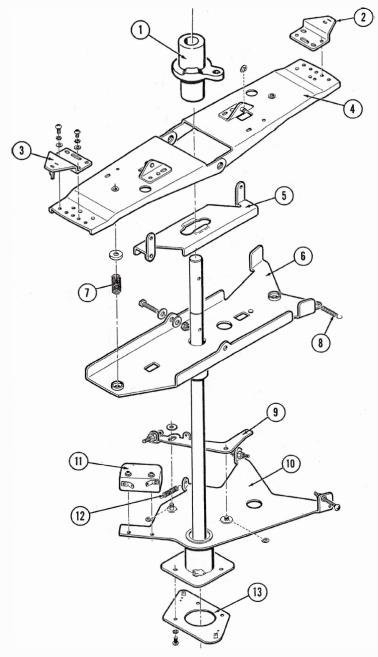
SELECTOR CRANK AND SHAFT ASSEMBLY
